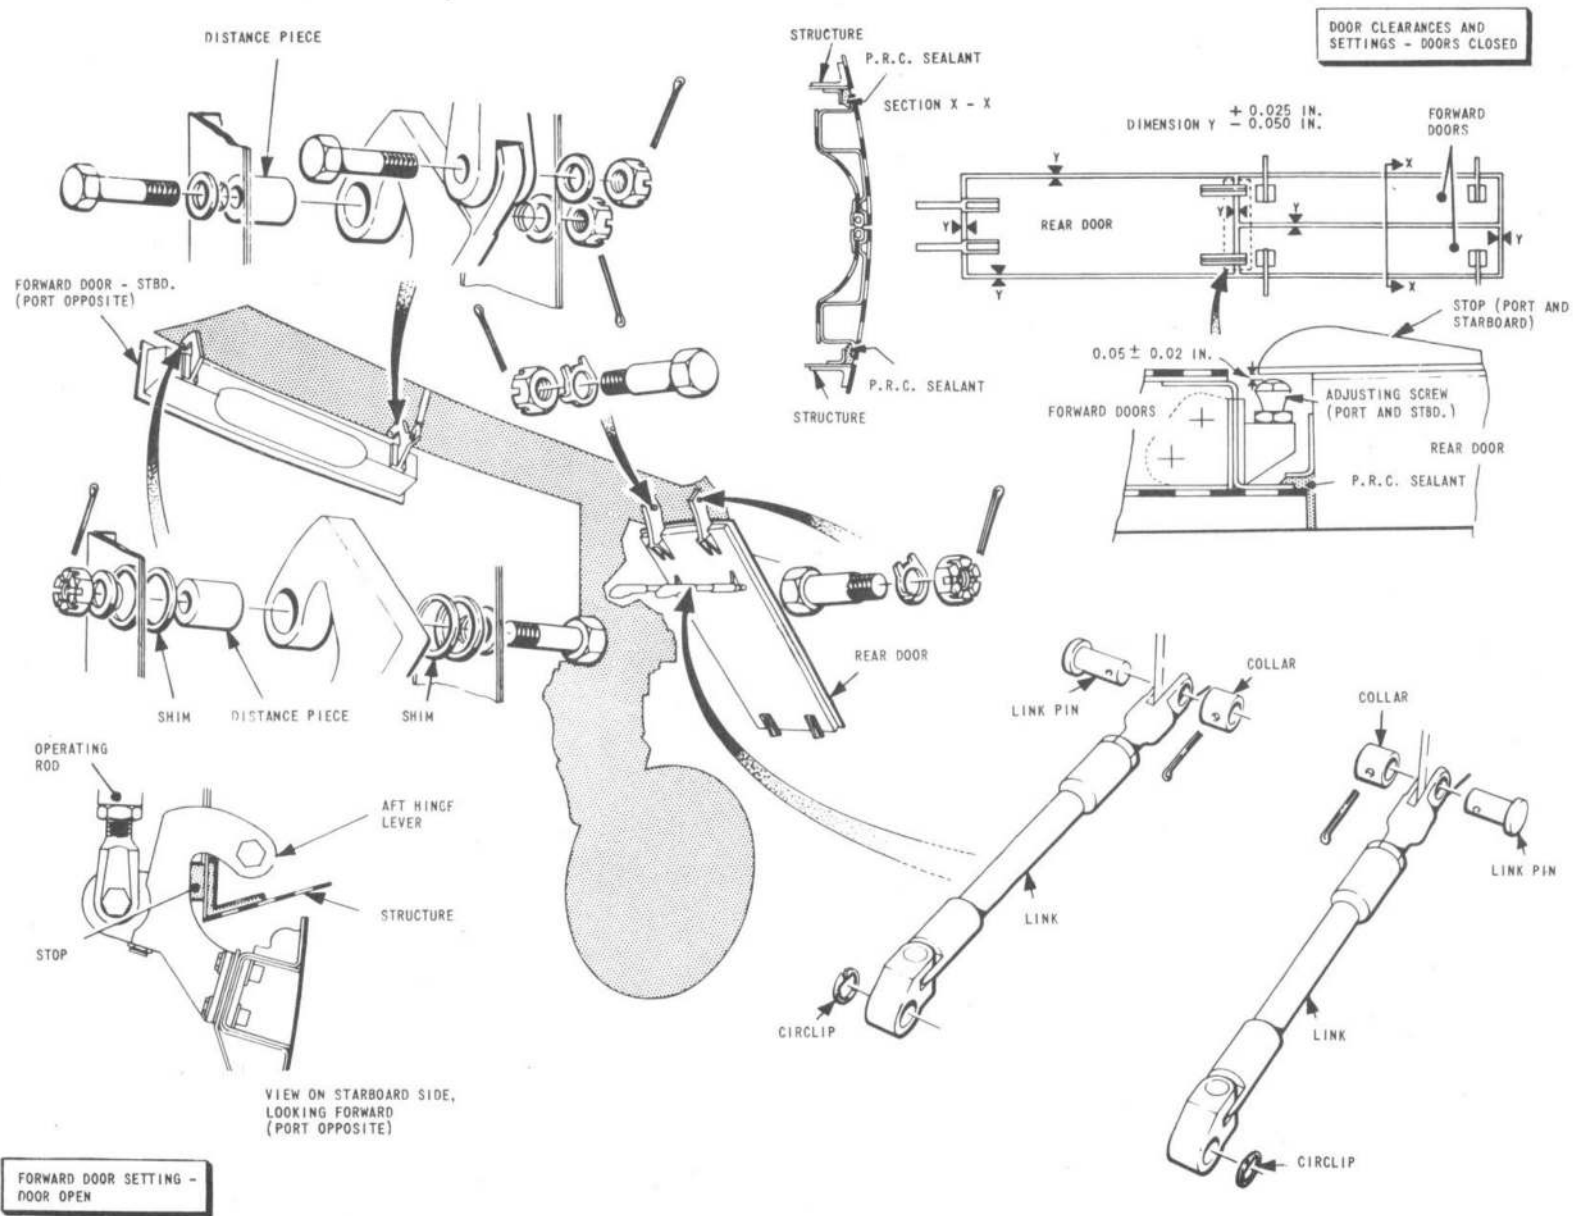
NOSE UNDERCARRIAGE DOORS — REMOVAL AND ASSEMBLY
